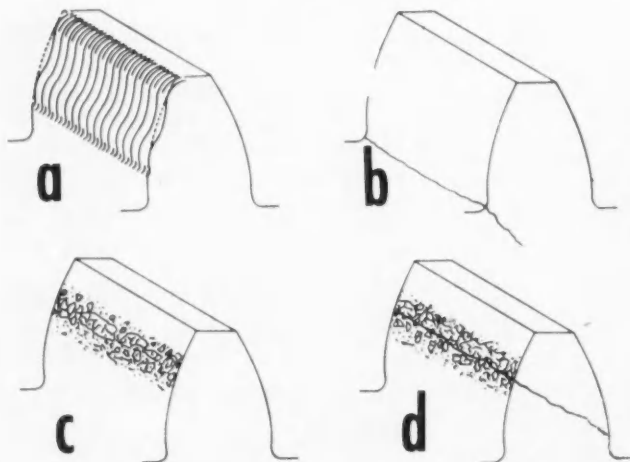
These typical gear tooth failures are: (a) wear and scuffing, (b) fatigue break through root of tooth, (c) pitting near pitch line, and (d) fatigue break through tooth starting from the pitted area
